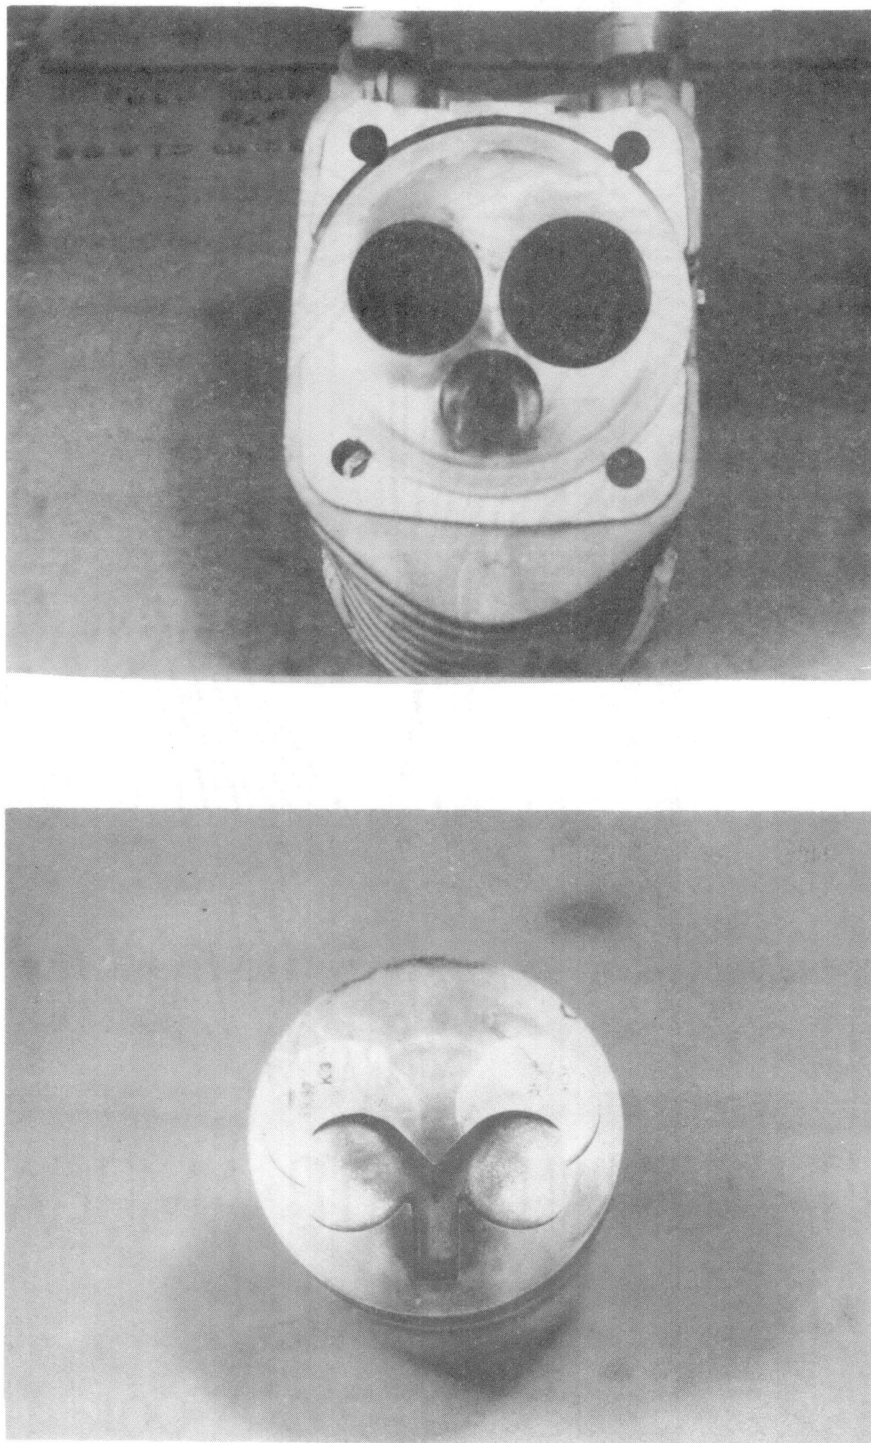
Cylinder Head (Top) and Piston Head (Bottom) of the Deutz Engine before Starting 200-hour Test
